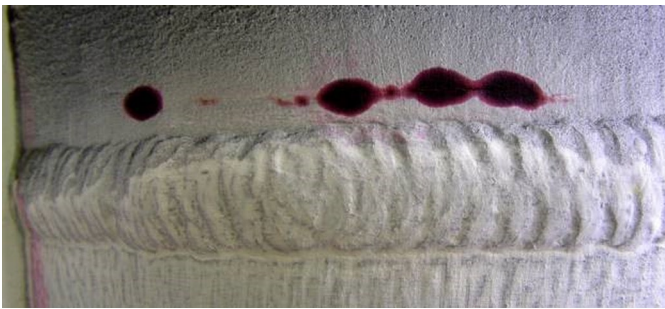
View of the A1 welded joint from the face side after penetration of the dye penetrant from the inside of the pipe
